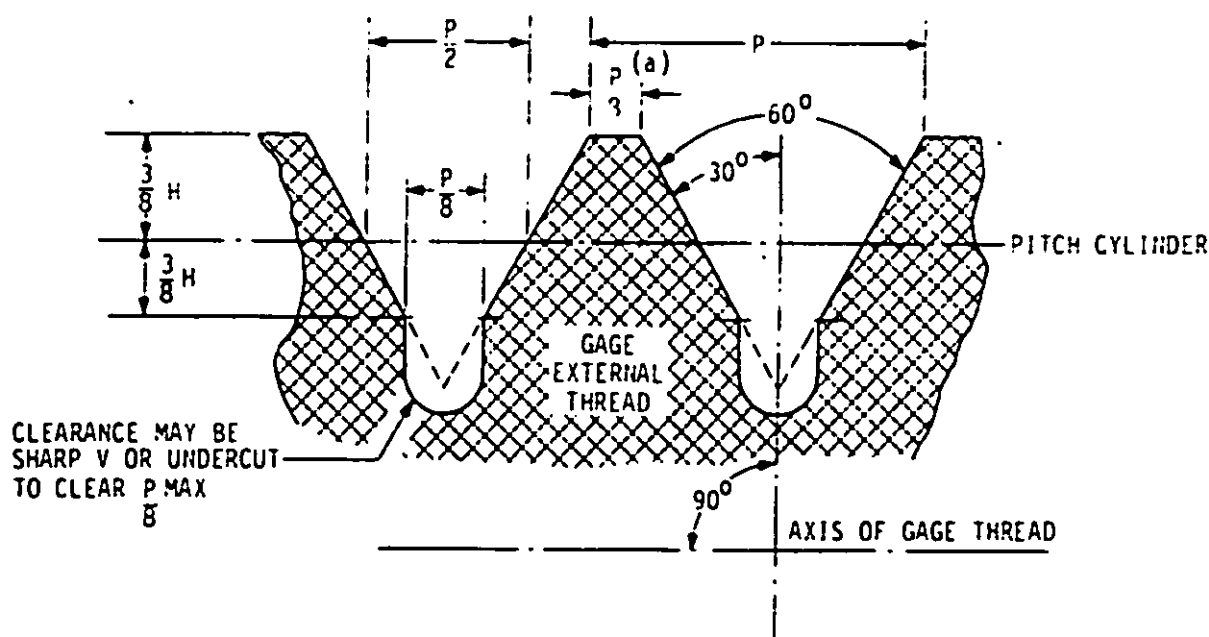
C.2 Internal thread profile with truncated flanks for thread gages
